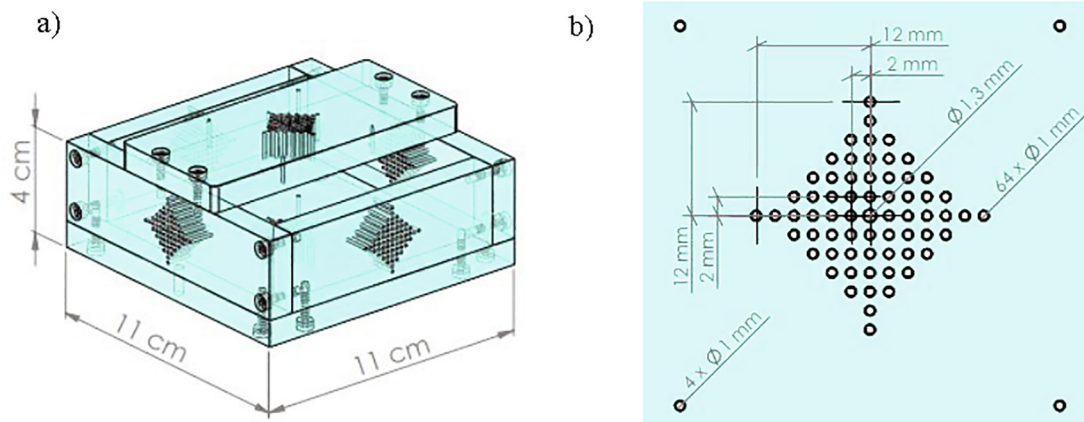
a) Plexiglass placement system, external dimension $11 \times 11 \times 4 \text{ cm}^3$; b) dimensions for the central patterns.
